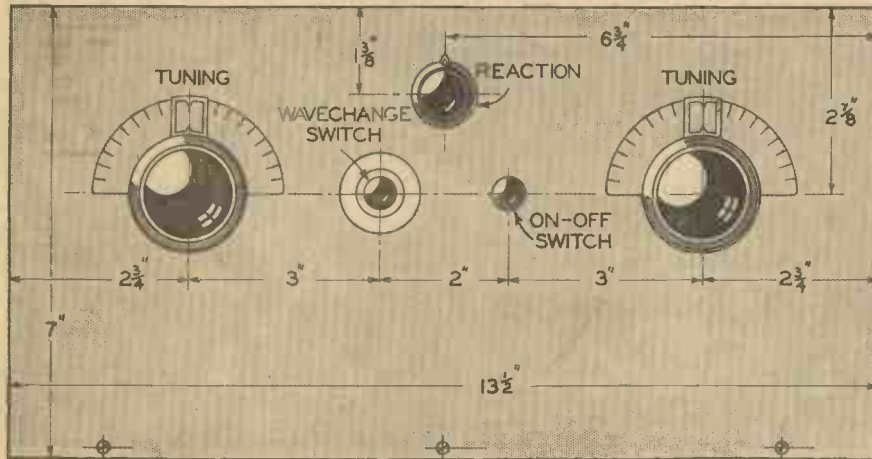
This drawing will be useful in drilling the ebonite panel.
